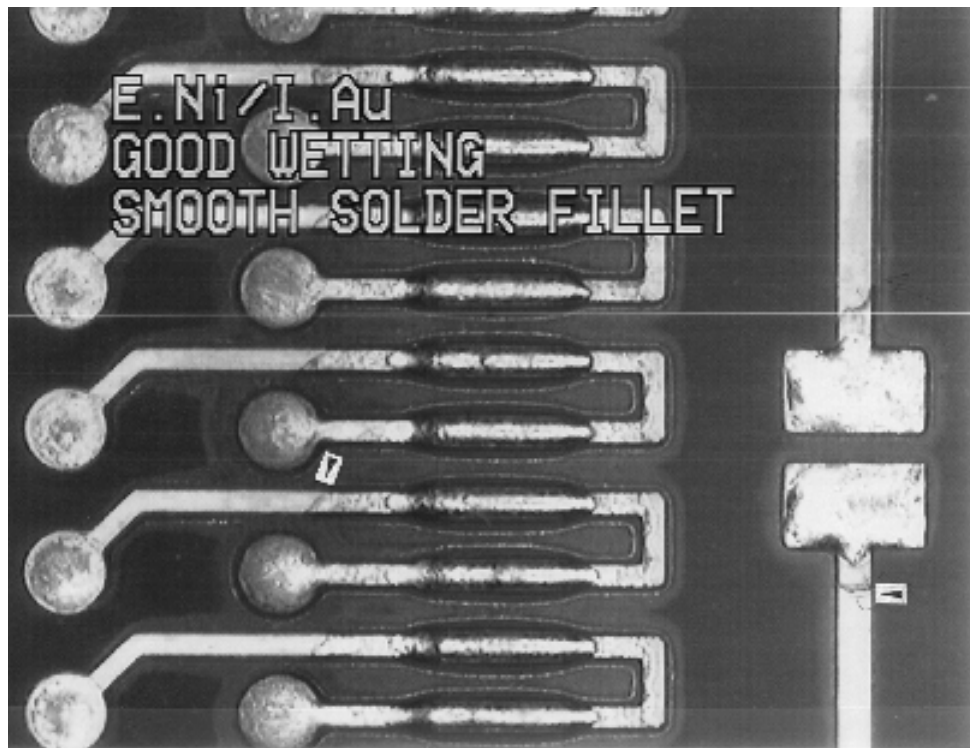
Solder Wetting on Electroless Nickel / Immersion Gold
